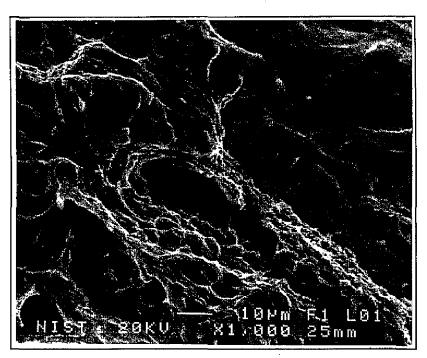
FRACTURE SURFACE OF THE SHOULDER OF THE RUPTURED CYLINDER THAT SHOWS DUCTILE TEARING TYPE OF FRACTURE (MAG. 1000X) -- ITEM 3A
